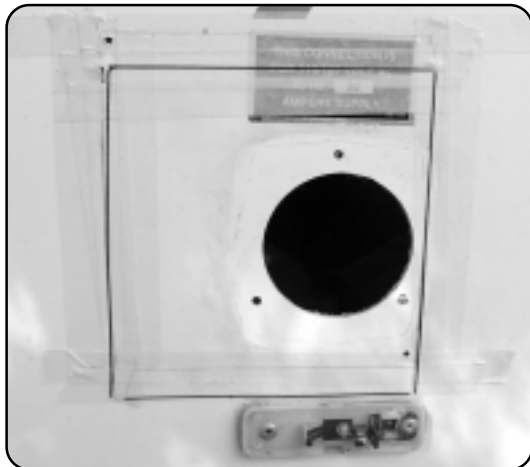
With the old power cord housing removed, cut line for the new housing was marked out using a template. Note the clearance light is too close and must be moved down.
